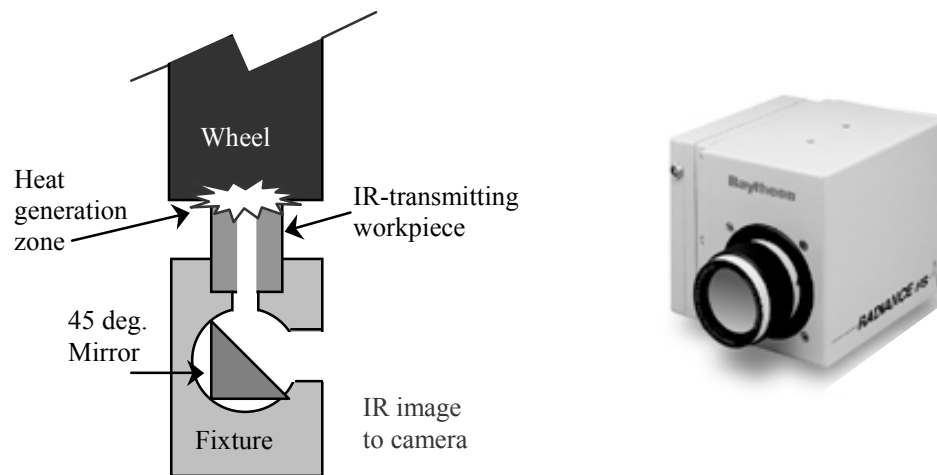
Illustration of IR imaging fixture and picture of IR imaging camera
